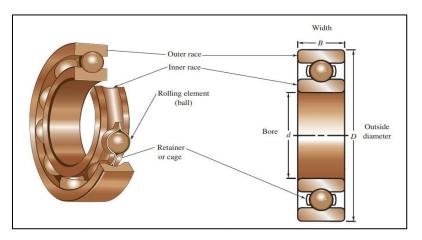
Single-Row, Deep-Groove Ball Bearings [1].
